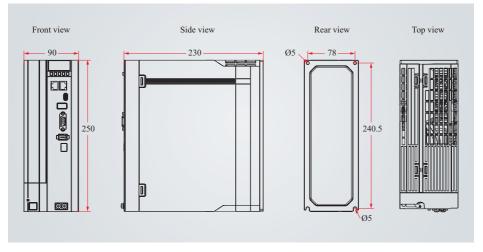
Installation dimensions for SIZE E (unit: mm)
